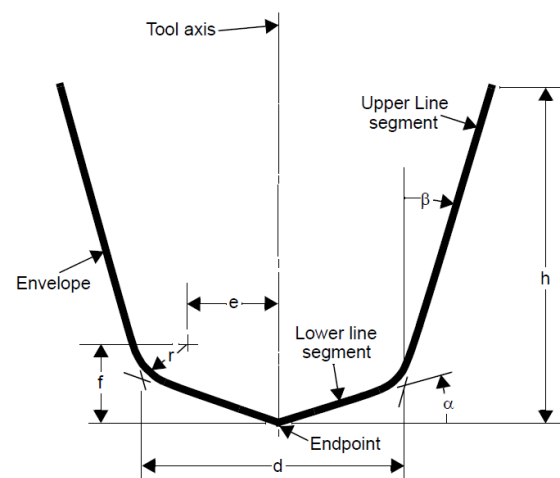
Definition of cutting tool geometry in MSC.Marc software.
